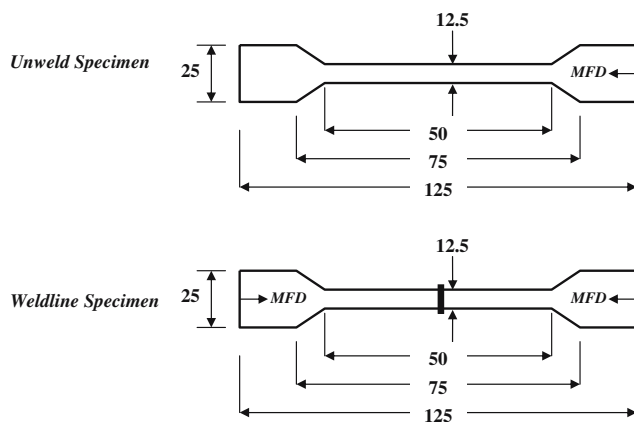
Tensile specimens with and without weldline (all dimensions are in mm)
